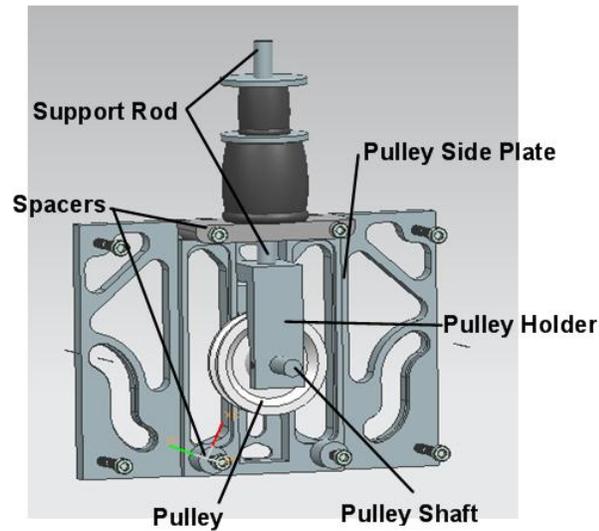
Detailed and Labeled Drawing of the Spring Assembly. Note that in this picture the front Pulley Side Plate has been removed so that the internal parts can be seen.
